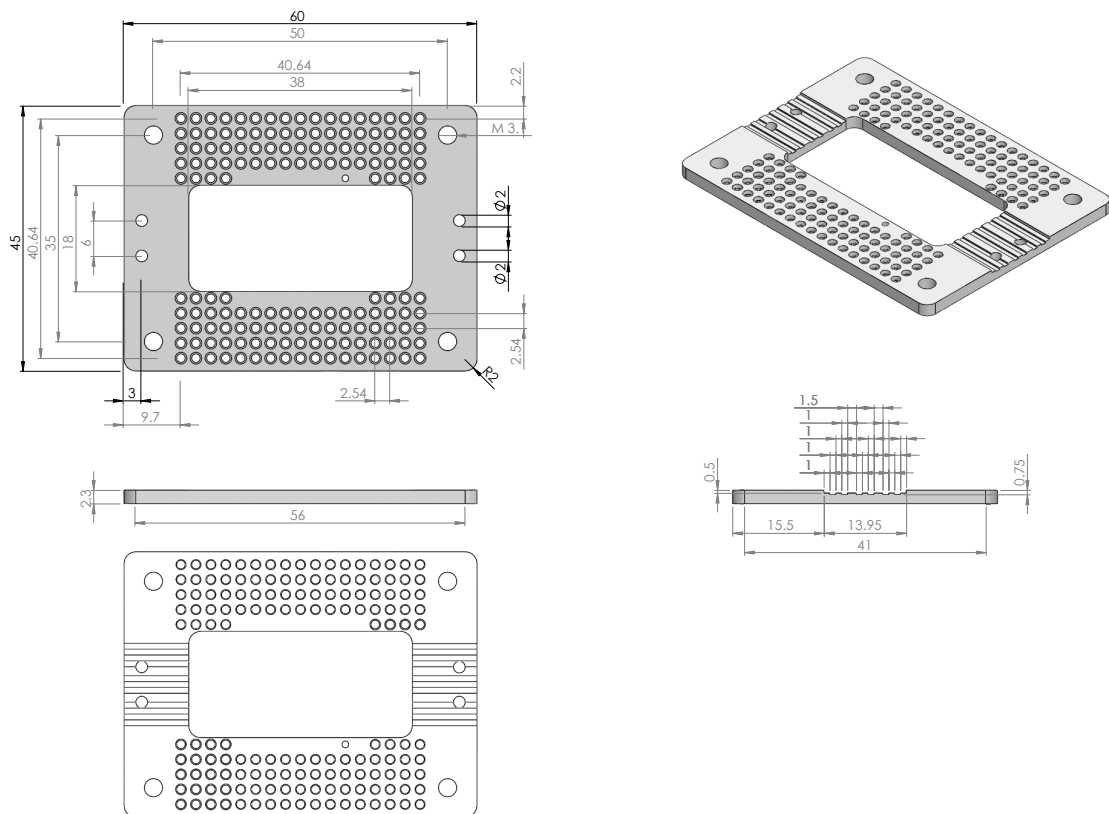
Top PEEK plate for housing pin receptacles and backside dc filtering.
